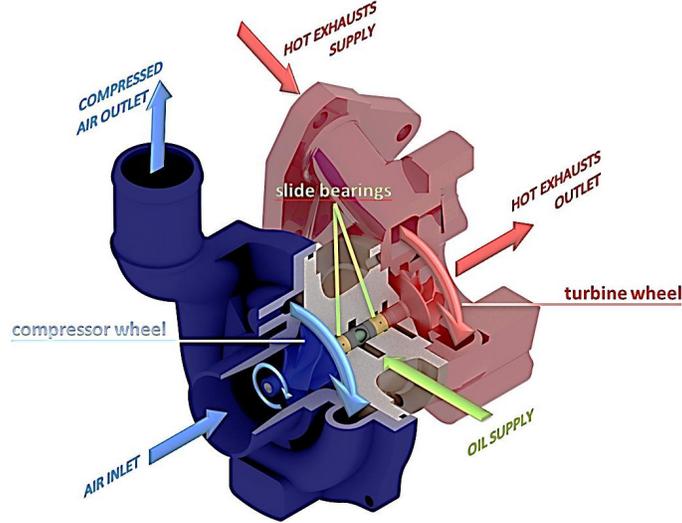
Cross-section of turbocharger: compressor, lubrication system, turbine.
